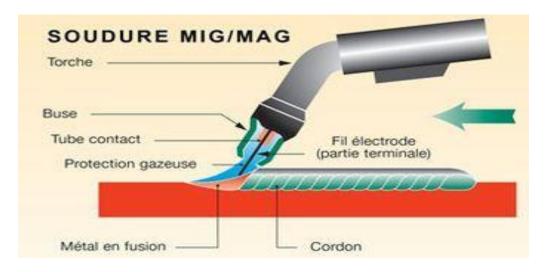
10 - MIG/MAG Arc Welding Process. [J]
